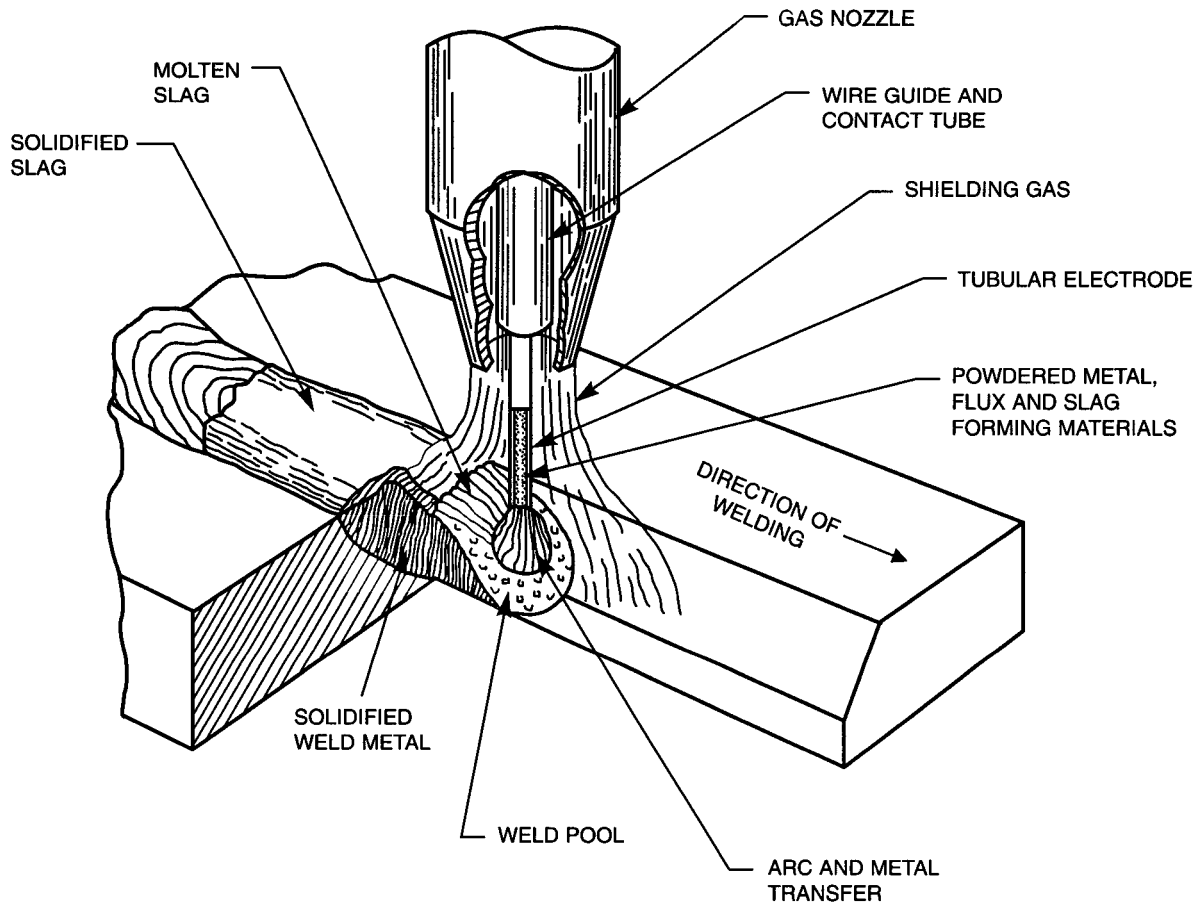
Gas Shielded Flux Cored Arc Welding
